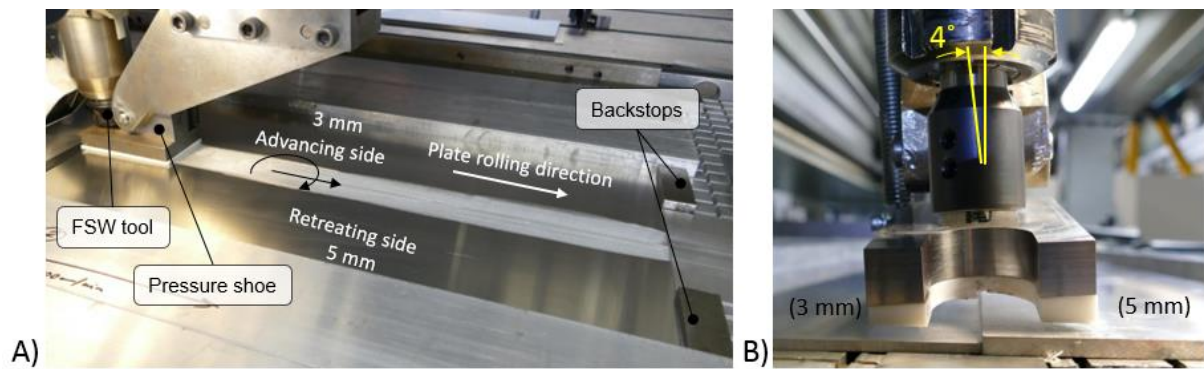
Welding setup for the 3 to 5 mm thickness combination A) general view and B) detail of FSW tool (Courtesy of TWI, Ltd).
